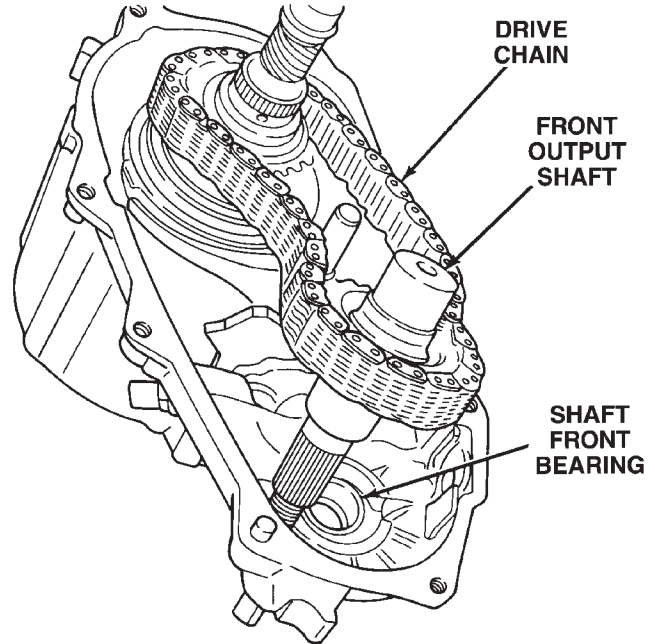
Disengaging Front Output Shaft From Front Bearing
